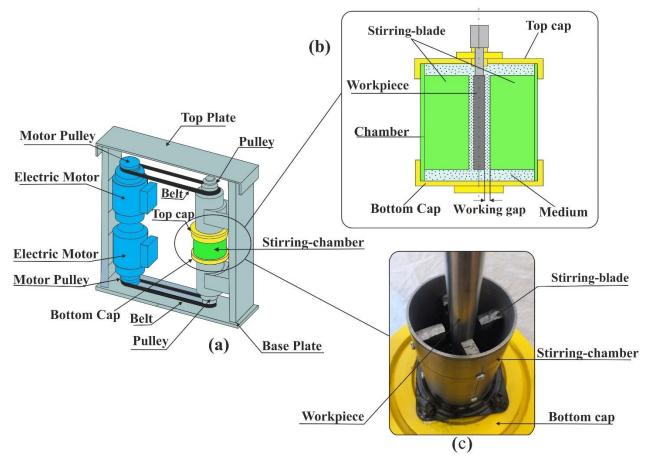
Schematic of (a) RAF set-up and (b) magnified view and (c) photograph of the stirring chamber and workpiece assembly.
